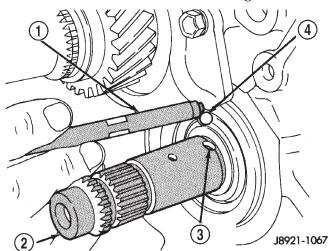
Install Fifth Gear Thrust Ring Lock Ball
